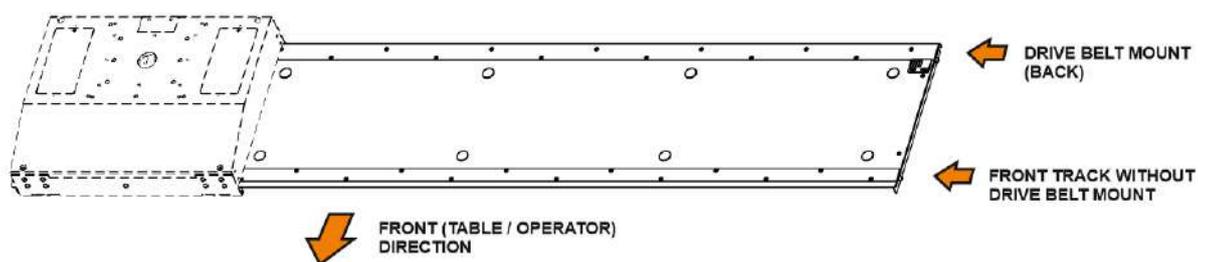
Floor rail orientation (standard 247 cm rail shown)
